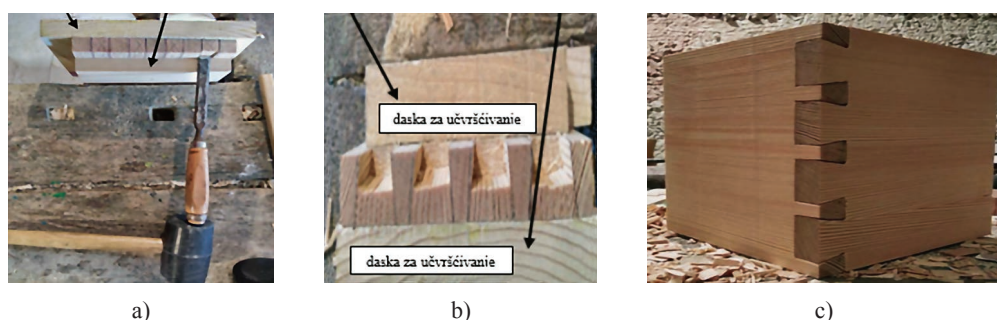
A mitered-through dovetail: a) marking out, black arrows indicate auxiliary panels used to secure the joint, b) hand crafting, c) final joint
